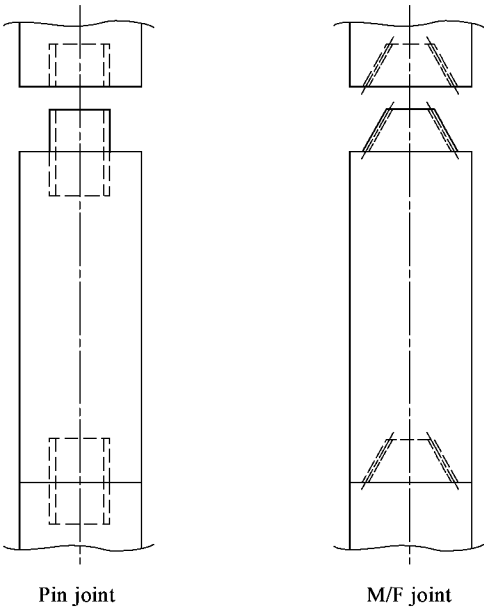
Prebaked electrode joints. Courtesy of UCAR Carbon Technology Corp.
